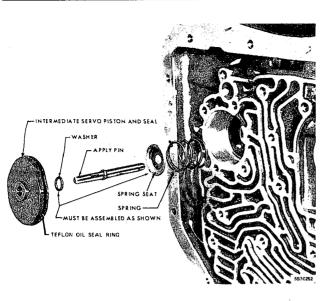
C-175 Intermediate Servo Assembly - Exploded View
